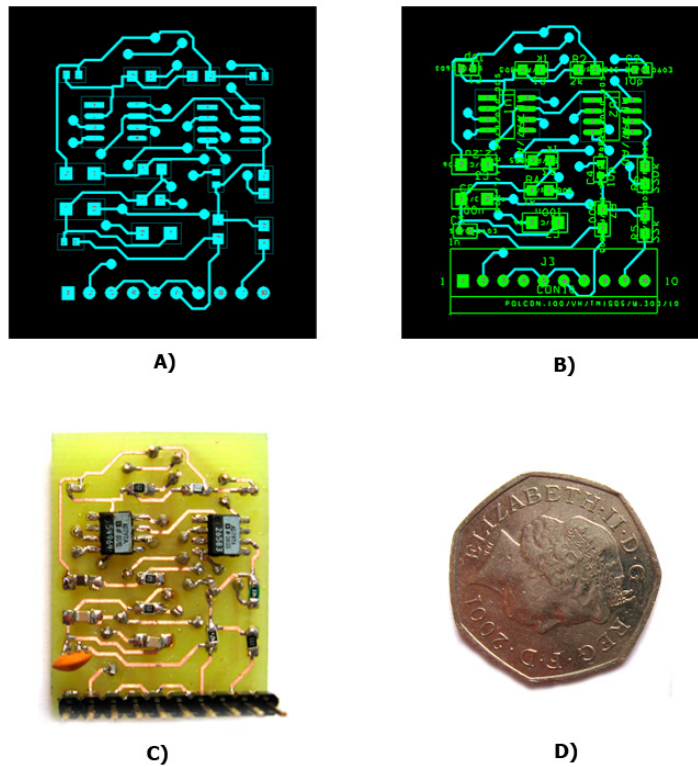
PCB design of the pre-amplifier. (A) PCB bottom layer, (B) PCB top layer, (C) Assembly with surface mounted components, (D) Reference for size comparison.
